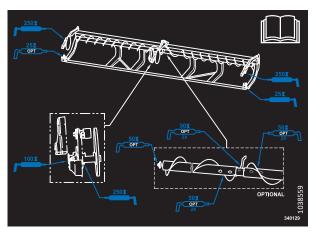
Decal for Double-Knife Header with Two-Piece Upper Cross Auger
